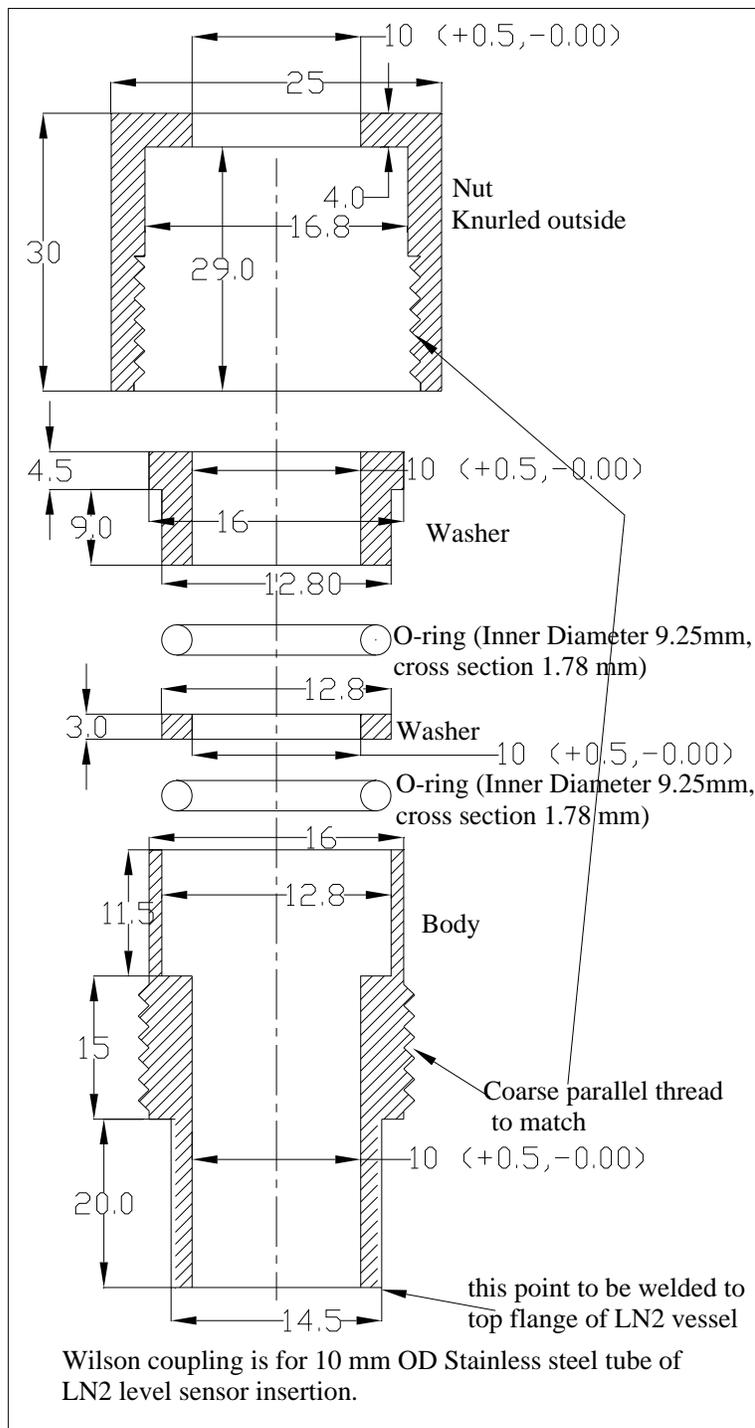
Exploded view of Wilson Coupling used for LN₂ level sensor of helium purifier
